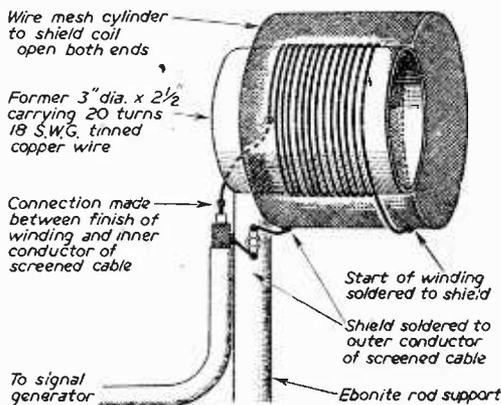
Details of a shielded coil for aligning portable receivers.
